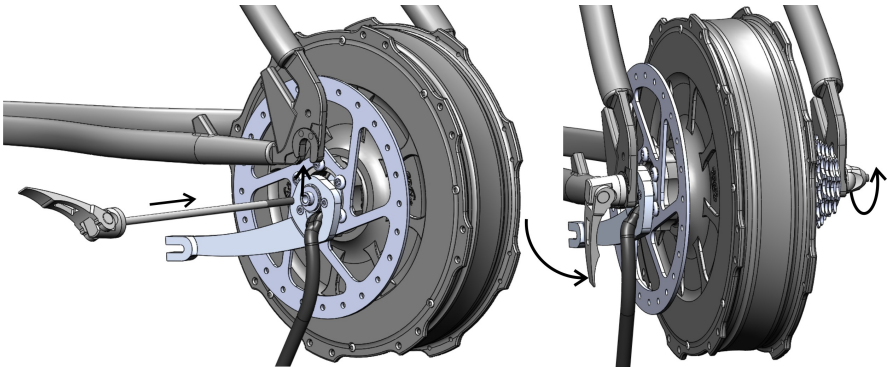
Install hub with torque arm facing forward, using QR skewer or thru-axle. Ensure that cable exits down and out of dropout slot without getting pinched.
